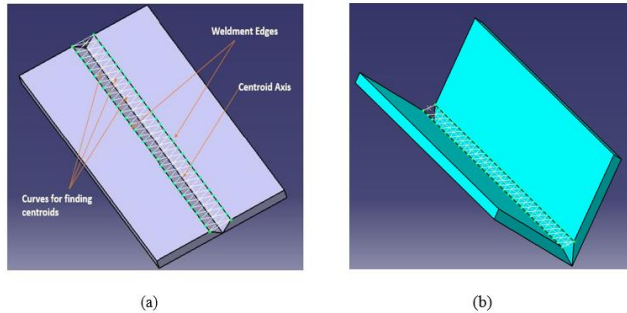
Sewing diagram in CATIA for butt and I shape weld joint
